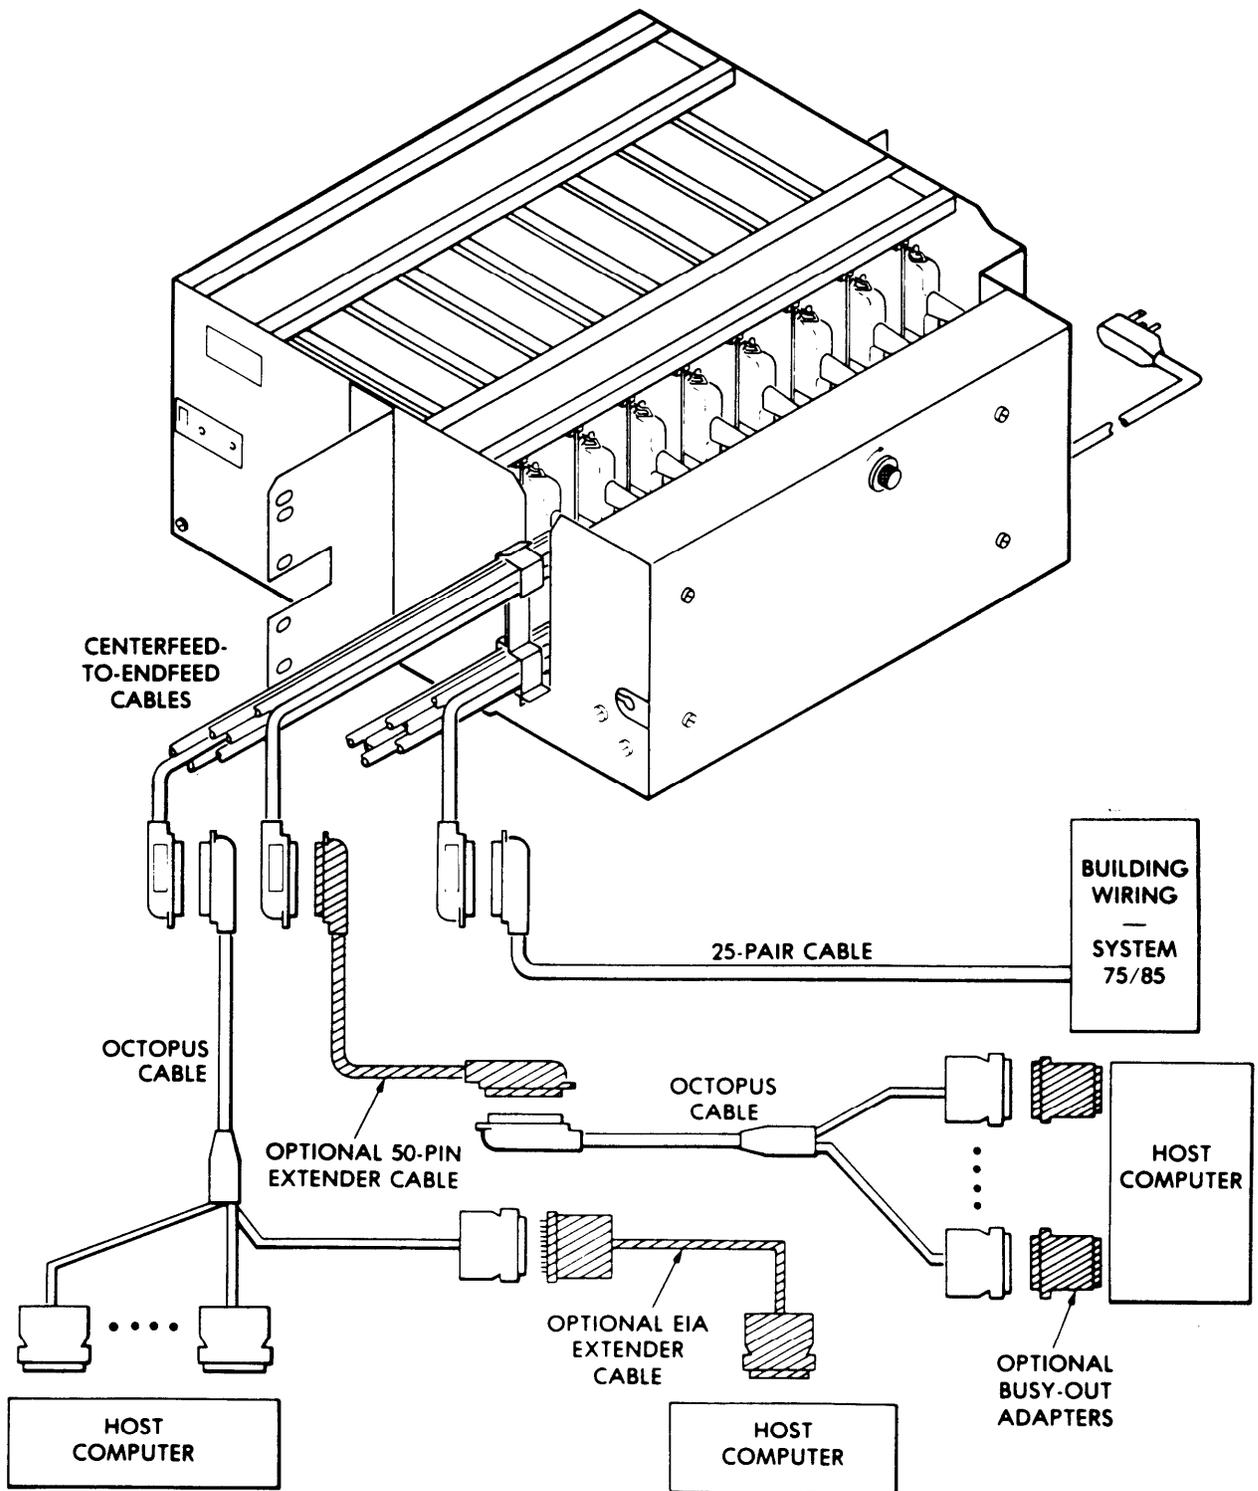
MADU Multiple-Mount Cable Installation (Rear View)
